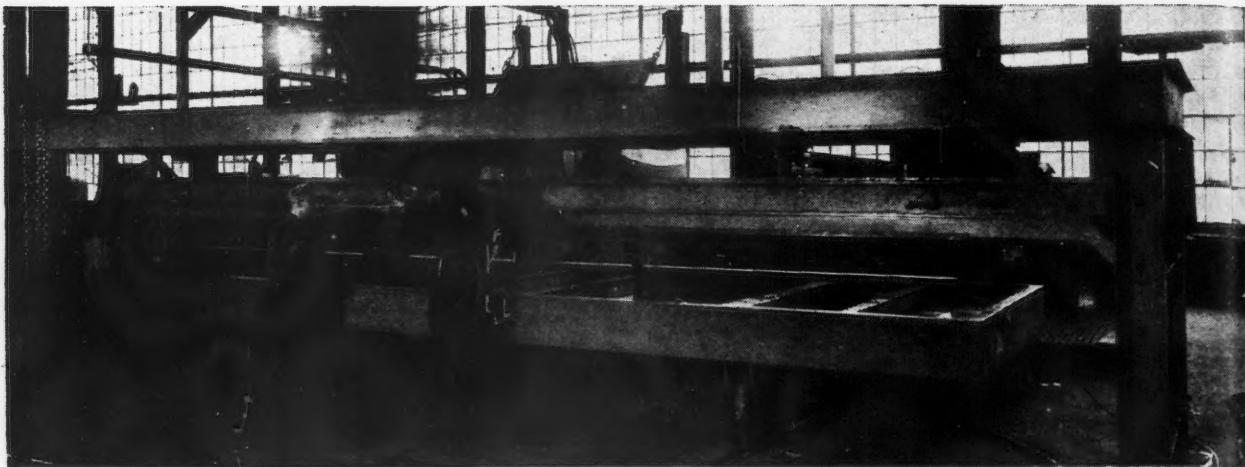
General view of Lincolnweld automatic arc welding installation used in fabricating ship hatch covers.
